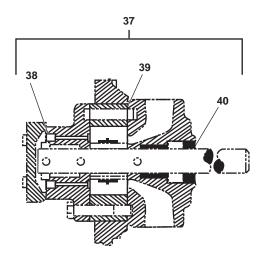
Hydraulic Watertight Doors (Sheet 8 of 9)
